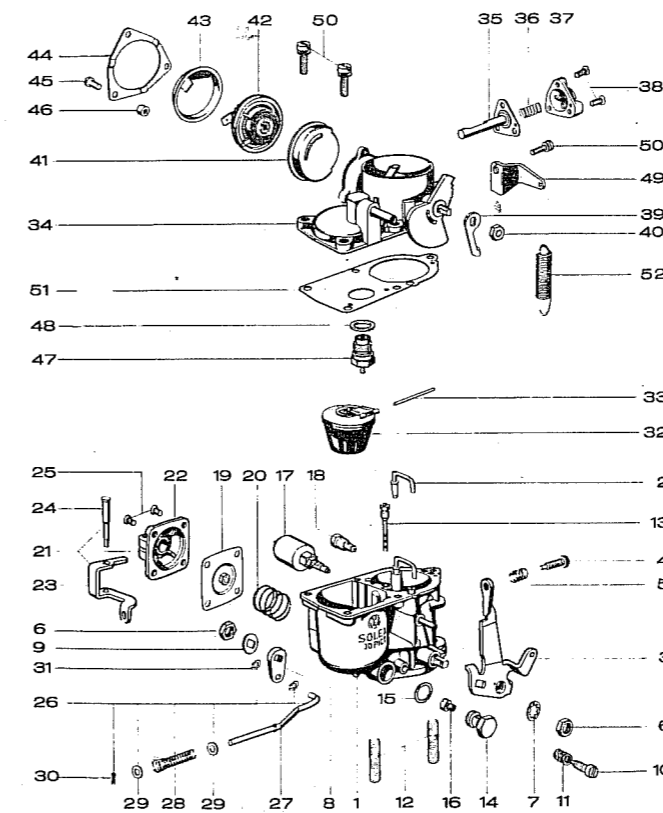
Exploded view of the Solex 30 PICT-1 carburettor.
